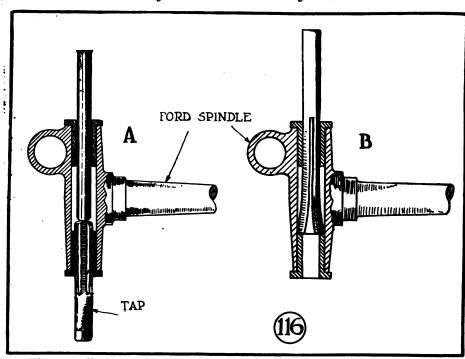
Two methods of removing spindle body bushings. A shows a tap started in one of the bushings so that an old spindle bolt can be driven against the bottom of the tap, both tap and bushing being driven out. B is a split pin which is compressed to get it in the top bushing, the legs then spreading out so that they will push the other bushing out
